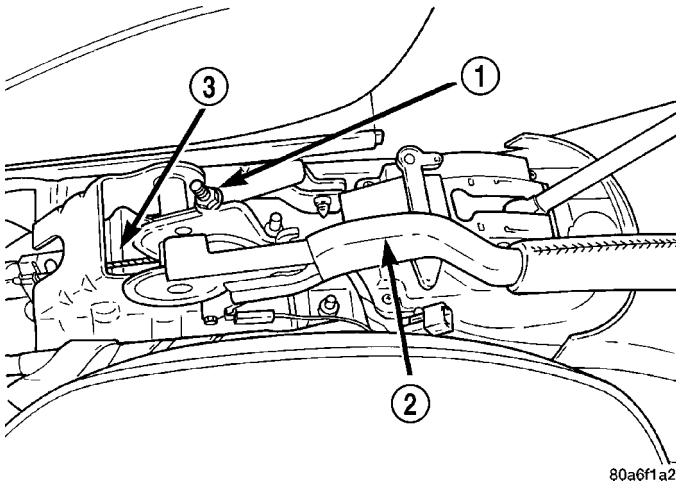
Park Brake Lever Output Cable Adjustment Nut
